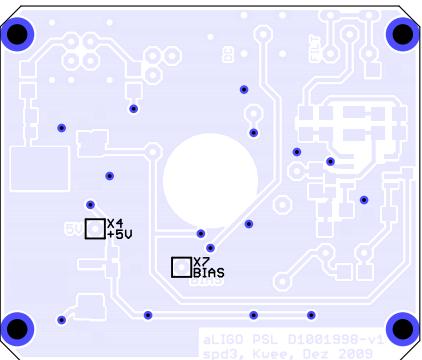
Board bottom view showing connectors, test points, vias and wired components
